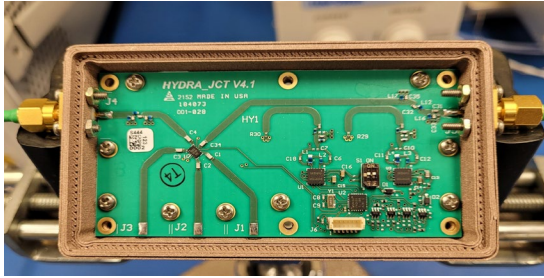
HYDRA PCB in ISM 3D-printed housing. Weight: 56% of AL housing, RF loss: 2.25 dB, 1.8 dB for AL
